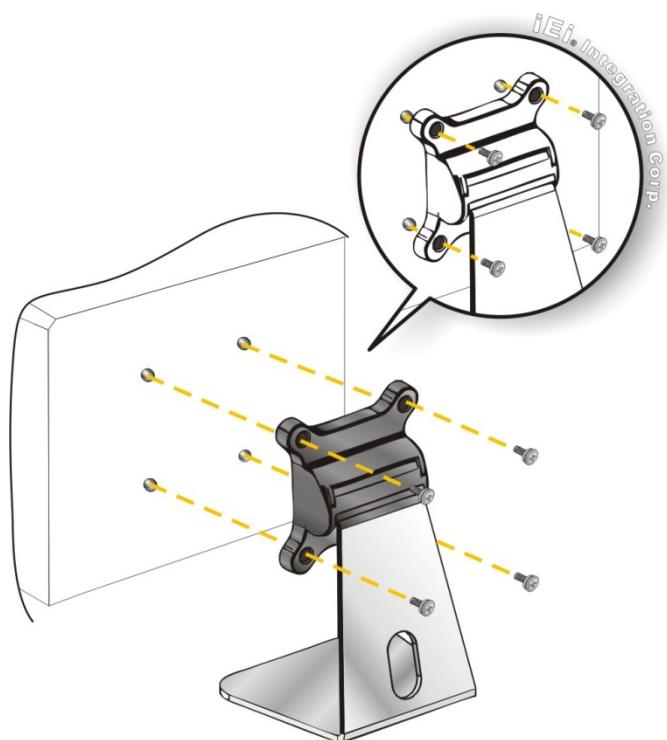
Stand Mounting (Stand-A/Bxx)
